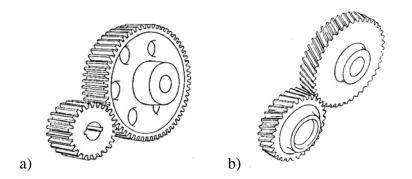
Cylindrical gears with parallel shafts: a) Spur gears, b) Helical gears
